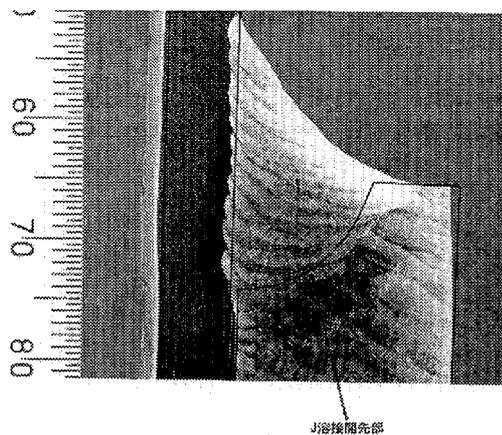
Cross-section view of ICM housing J welding.
